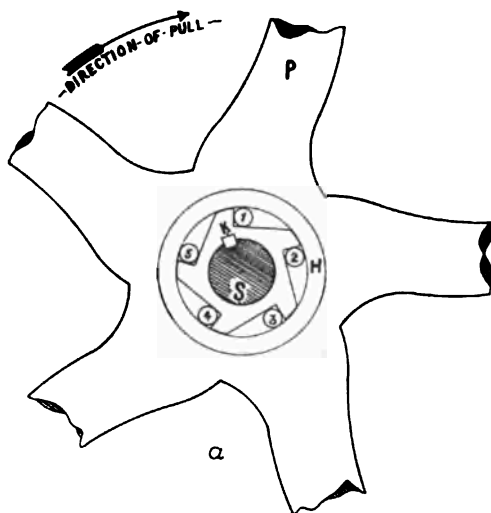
Safety device to prevent blower from being reversed. P, Pulley for belt to motor. S, Shaft of blower. H, Hub of wheel. K, Key 1, 2, 3, 4, 5, hardened steel rollers which engage when pulley is running in right direction, but disengage when pulley starts in opposite direction.
